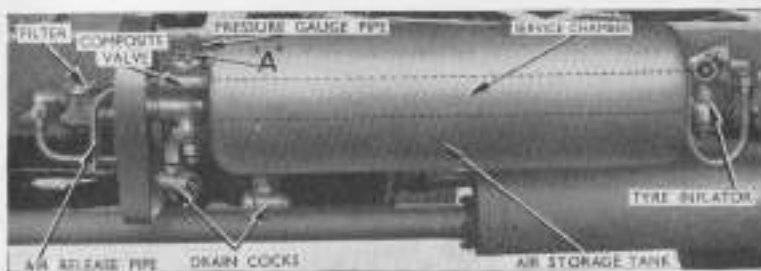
Air Storage Tank (Clayton-DeWandre).
